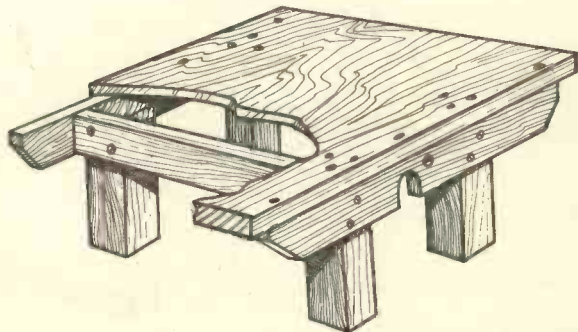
SEMI-SECTIONAL VIEW OF SAW TABLE.
